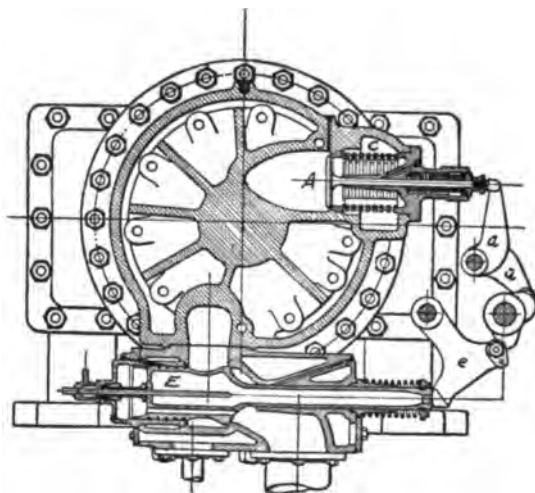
American Crossley Engine, Inlet Valve at A, Exhaust Valve at E.
